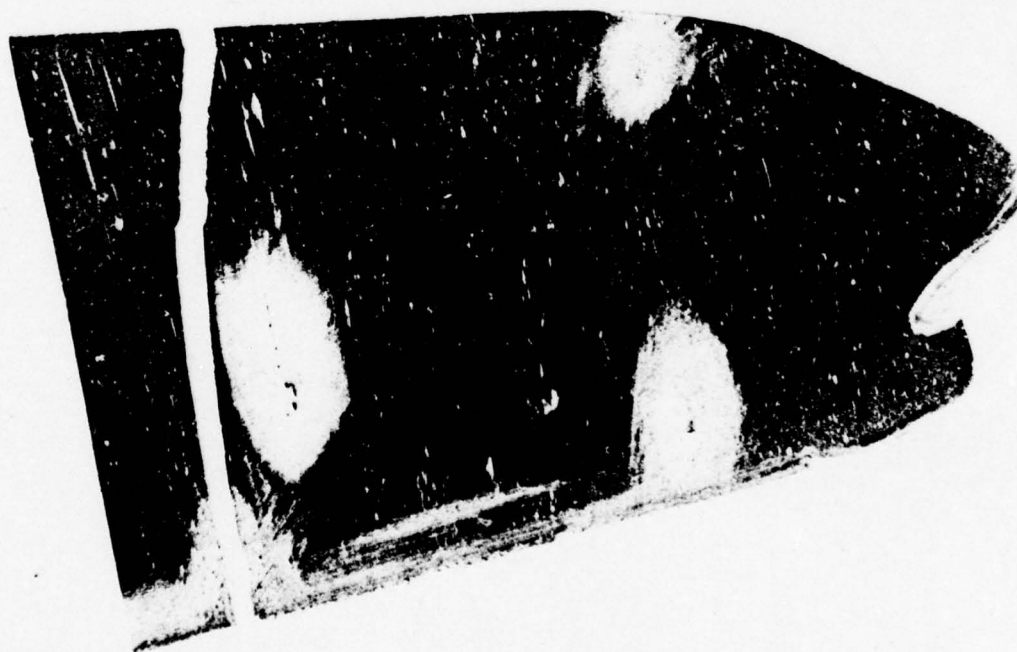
PROPELLER TIP FAILURE — FRACTURE SURFACE
